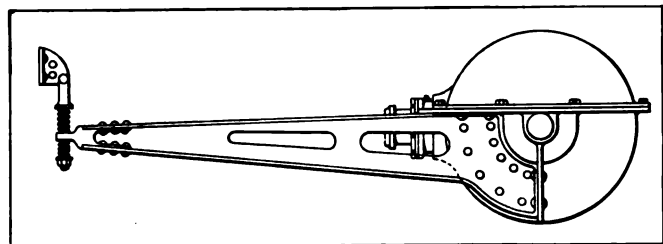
Steel plate used instead of tube where a cross member of the frame prevents using a triangular type, as in Fig. 3
